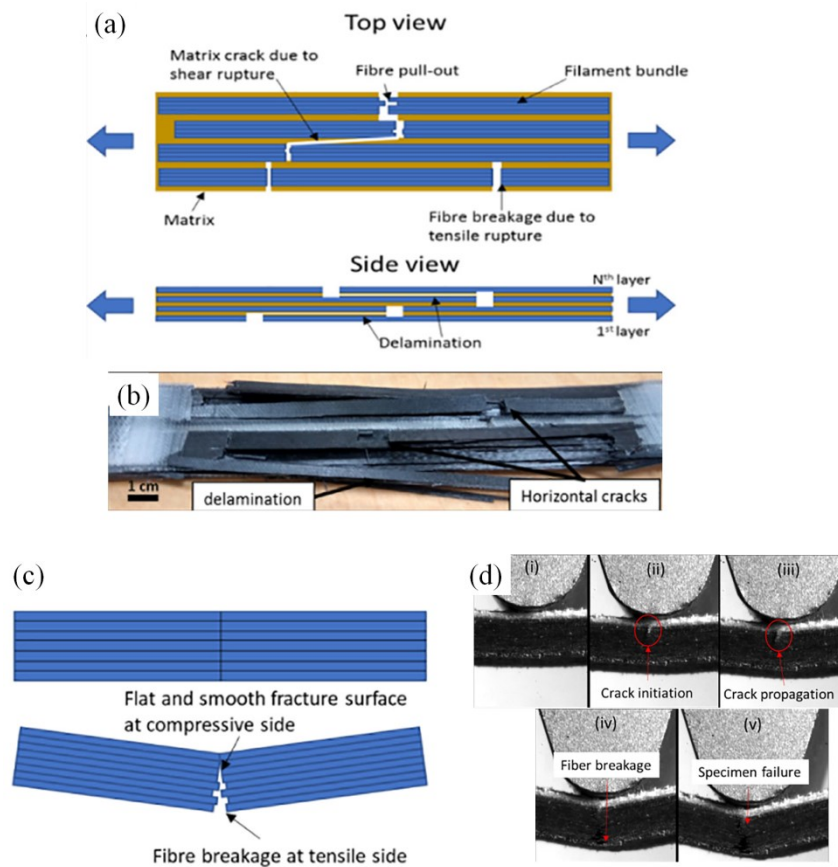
Schematic illustration of fracture mechanism of additively manufactured PA/CCF samples under (a) tension and (c) bending load case; (b) visual observation of the fracture mode of a tensile specimen showing cracking and delamination and (d) image sequence of the three point bending test captured using high speed camera [203]
